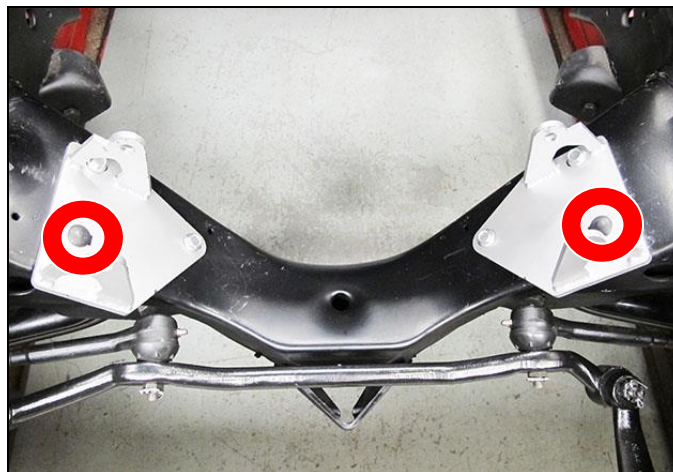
Install carriage bolts into top front hole of each bracket when installing 71221008HKR forward biased brackets.
